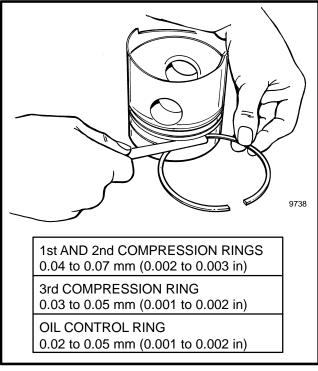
CLEARANCE BETWEEN THE PISTON RING AND THE GROOVE
